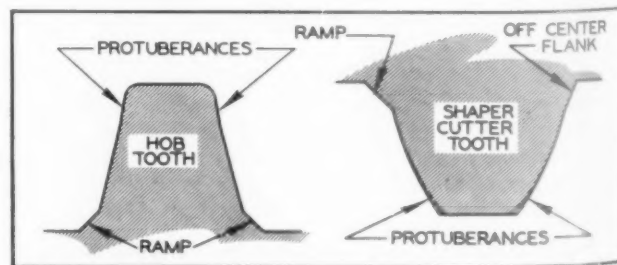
Nomenclature used in connection with pre-shave hobs and shaper cutters is illustrated in the sketches above.
